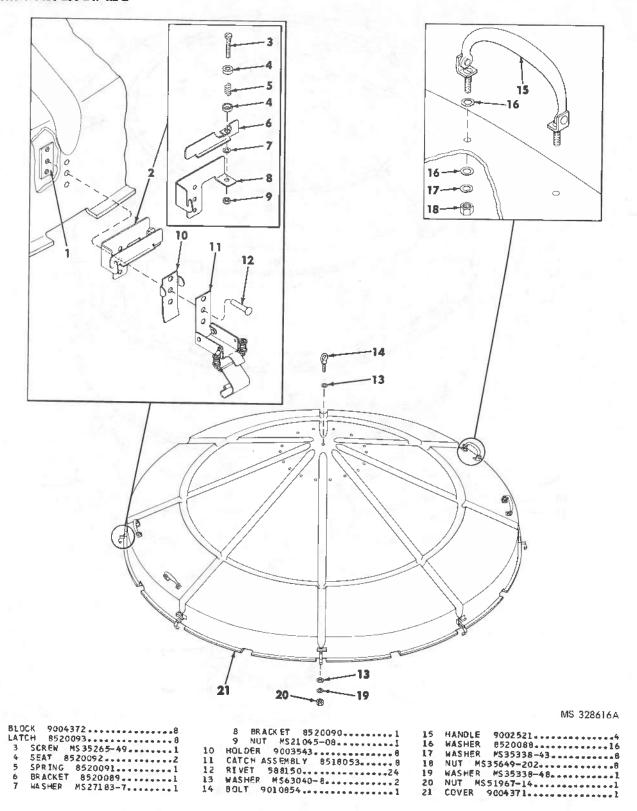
COVER. REFLECTOR ASSEMBLY /10665843/-EXPLODED VIEW /SEE FIGURE 273 FOR NEXT HIGHER ASSEMBLY/
